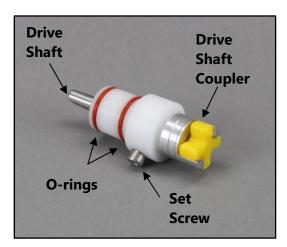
Replacement Sealed Bearing Unit VP 758MS
